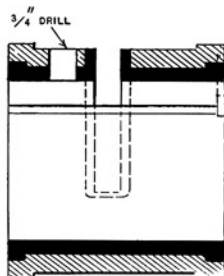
Fixture for babbitting Bearing Boxes for Elevator Shaft
